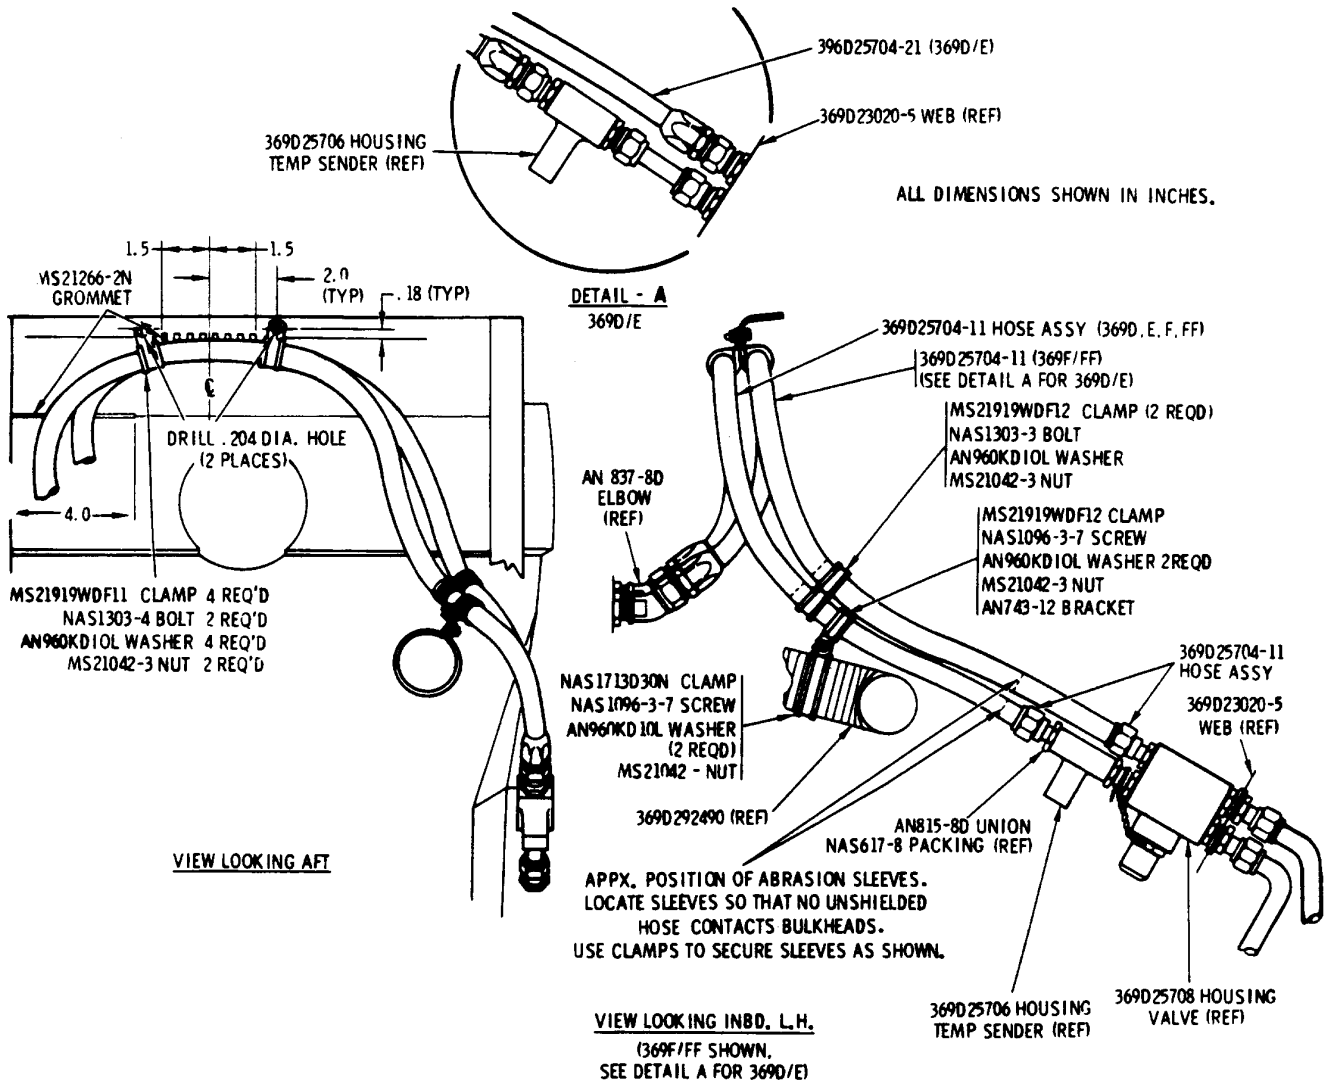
Main Rotor Oil Cooling Installation Bracket Removal
